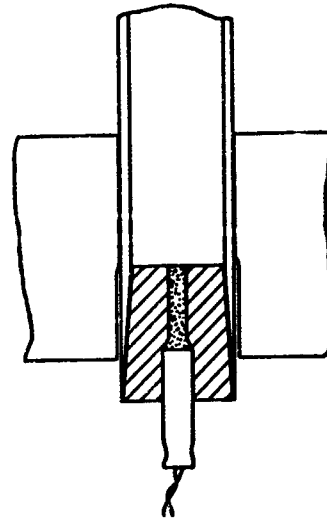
Schematic for Explosion Welding Tube to Tubeplate Using a Supersonic Detonation Rate Explosive and a Tapered Inner Surface on Tube (4).
